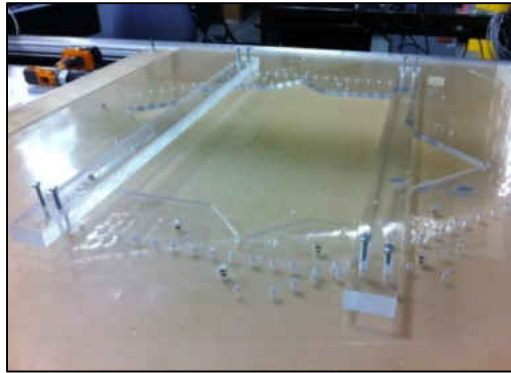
A fixture was made to hold the plates at the appropriate orientation angles (for machining the compounding angle)
